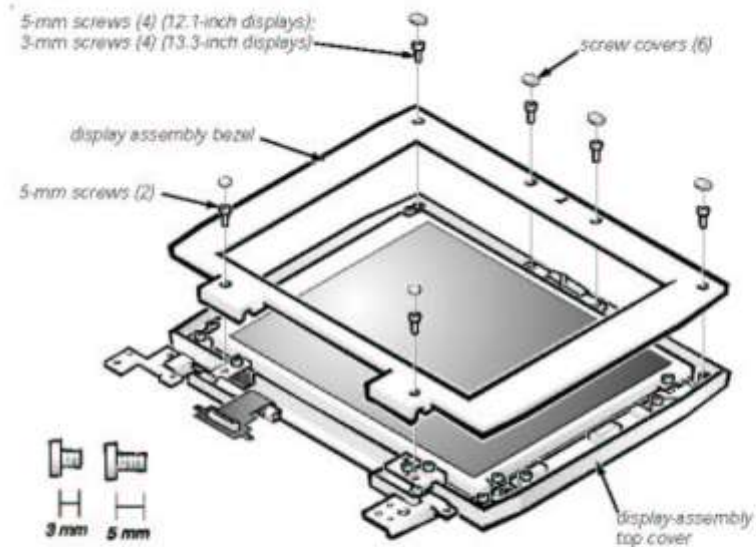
Display Assembly Bezel Removal (12.1-Inch Display Shown)
